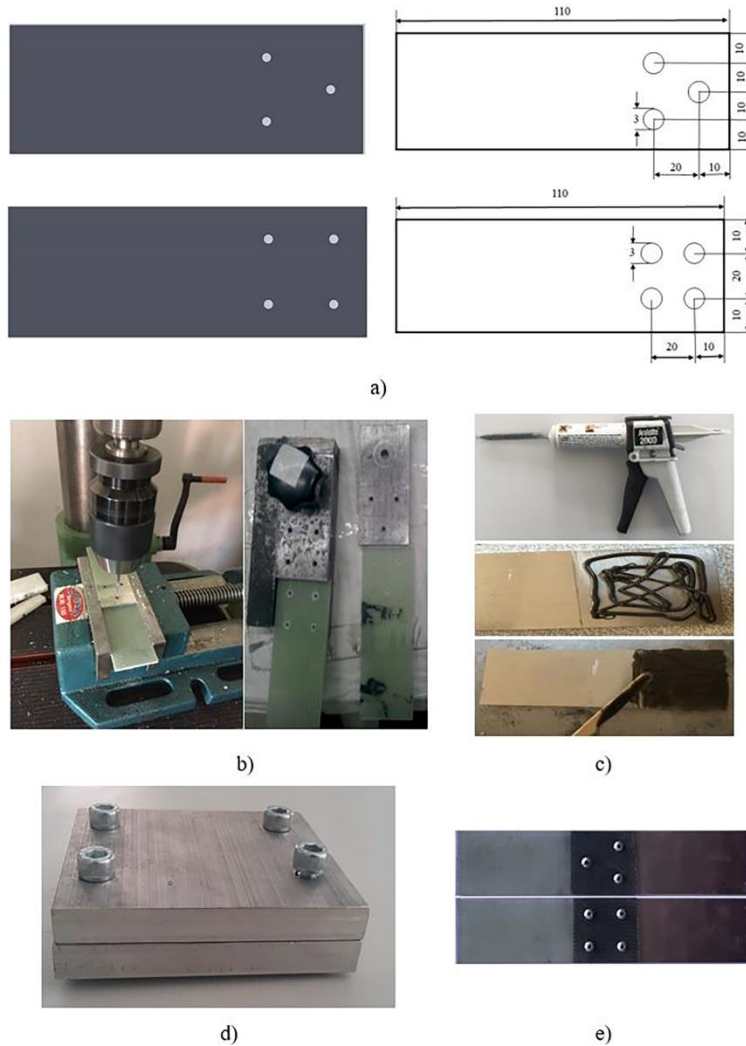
The dimension of the samples and their preparation process; a) dimensions of 3 and 4-hole plates, b) drilling process, c) adhesive process, d) fixture for adjusting adhesive thickness and e) bonded/riveted dissimilar single-lap joints
